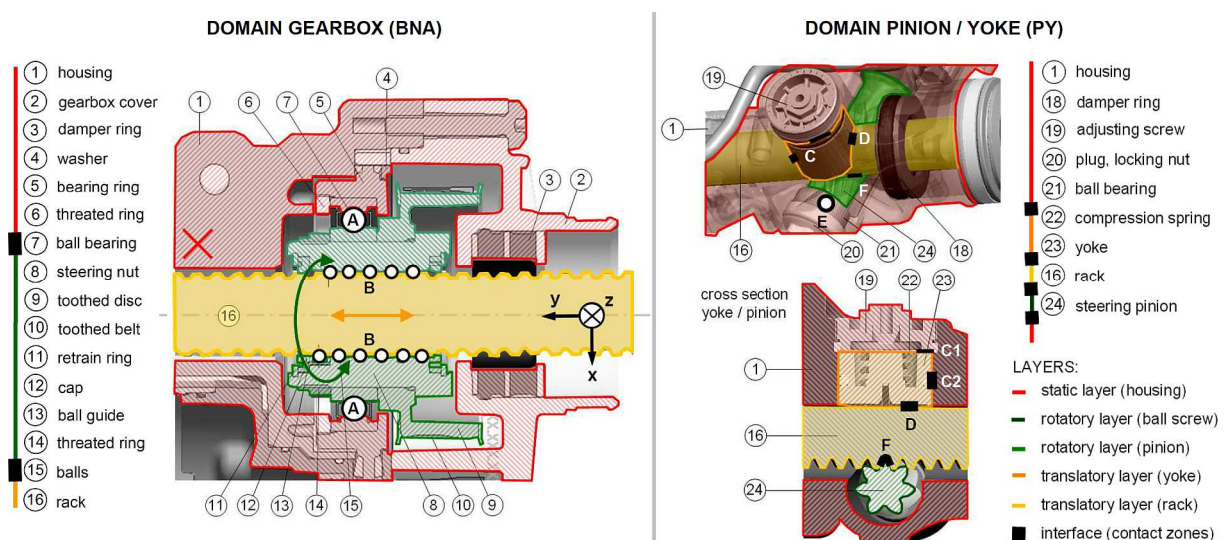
Layers within gearbox and pinion/yoke domain of EPSapa PL2 steering system
